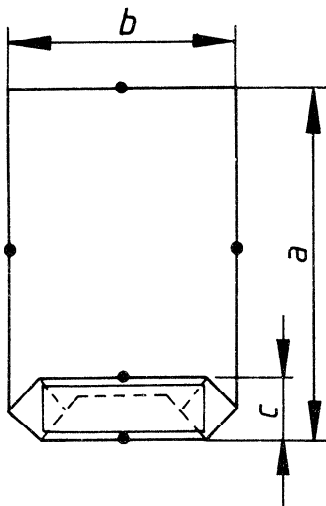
Open-mouth pasted flat hexagonal bottom sack
